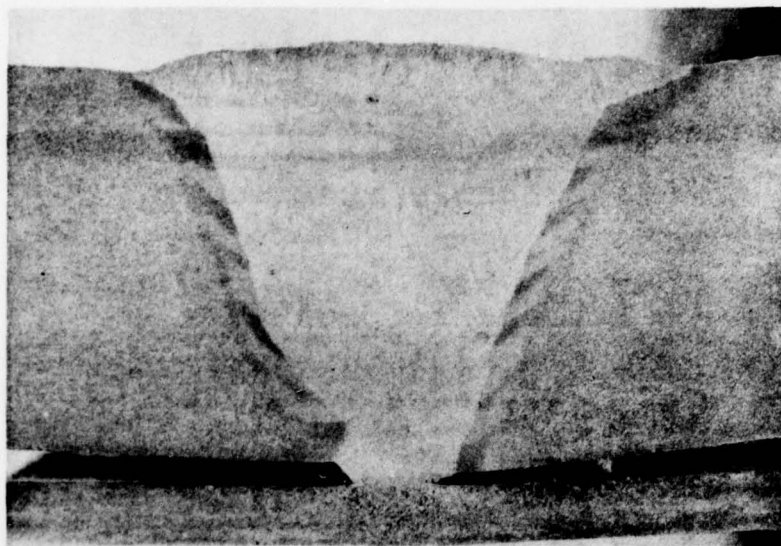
Typical cross-section of the A36 shielded metal-arc weldments (3/4 in. [19 mm] thick).
